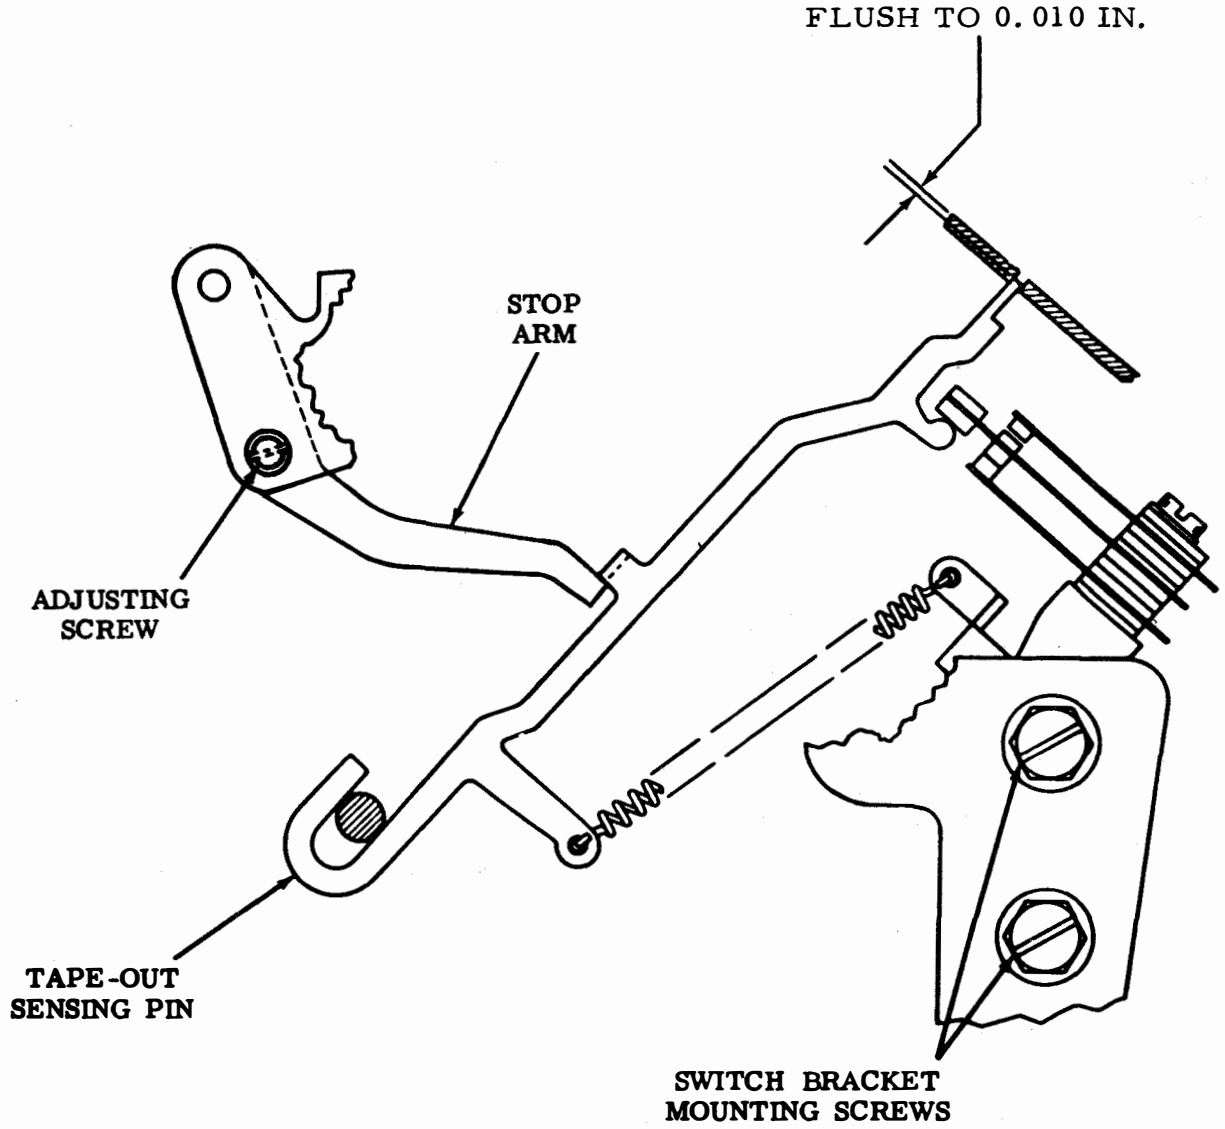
Tape-Out Sensing Pin (For Units Equipped With Tape Lid Sensing Lever), Front View
